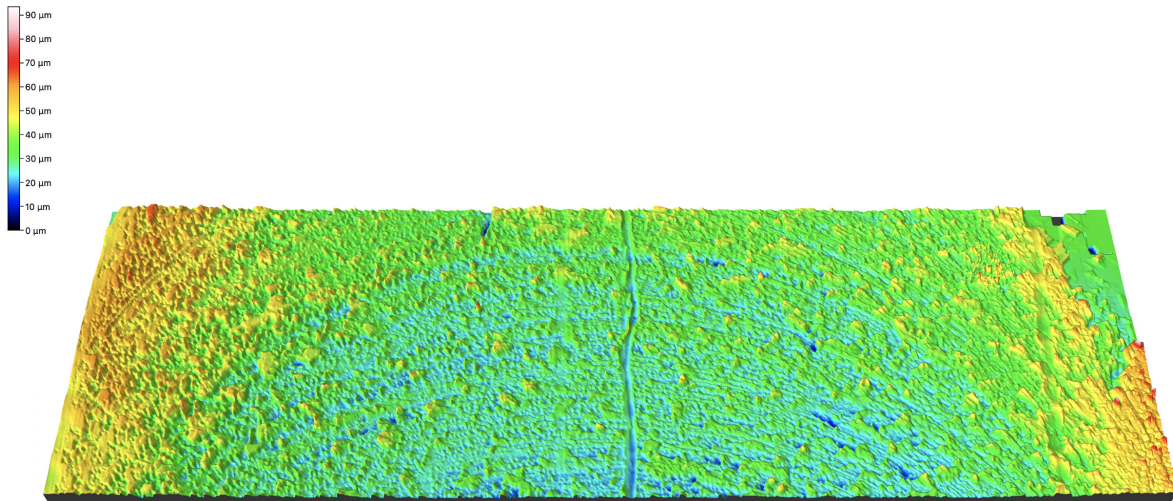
Optical profilometry image showing surface morphology of a 17 x 5 mm² area across the weld with a visible center line left by a caliper
